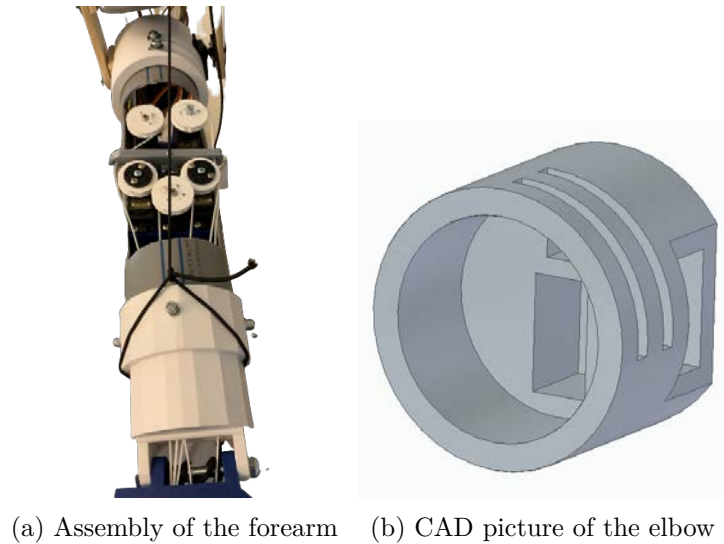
Figure of the forearm and the elbow designed in Solid-Edge [29].
